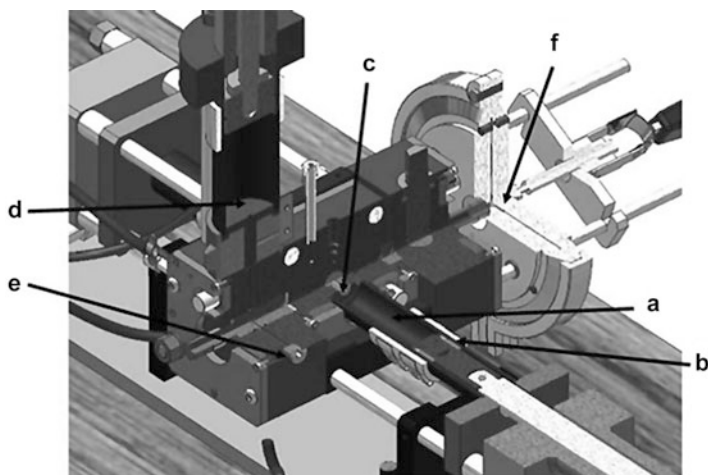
Three-dimensional view of the RMX device: (a) chamber, (b) piston with seal, (c) mixing element, (d) feeding unit for melt, (e) feeding channel for liquids, and (f) mold (Reproduced with permission from John Wiley and Sons)
